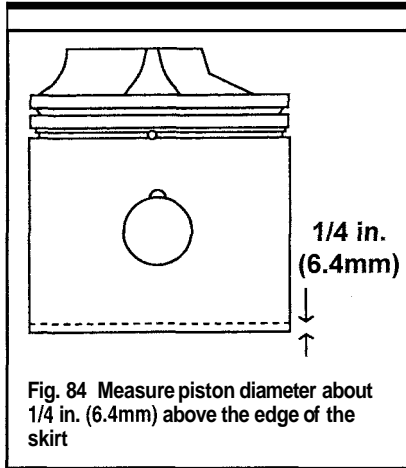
Measure piston diameter about 1/4 in. (6.4mm) above the edge of the skirt
